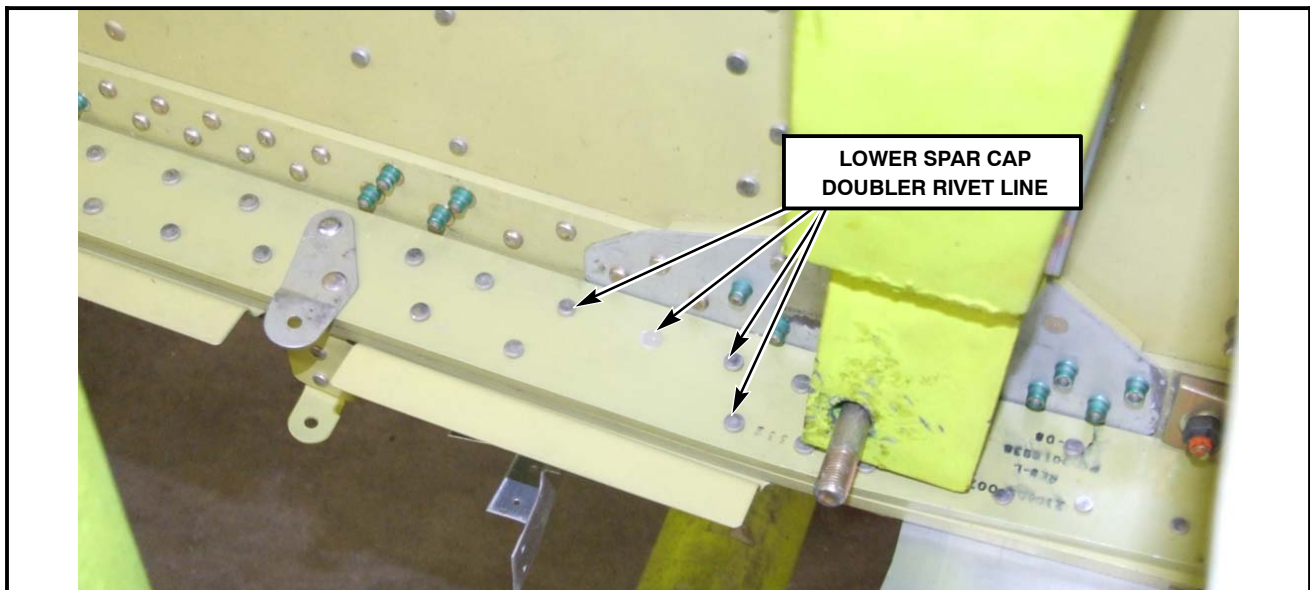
LOWER SPAR CAP RIVET LINE - LOWER SEAT PAN
